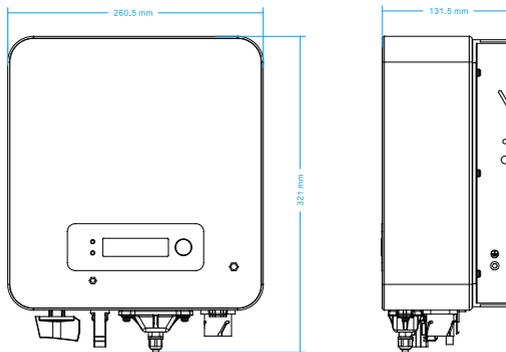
Front view and left view dimensions of SOFAR 3.3KTL2-G3
